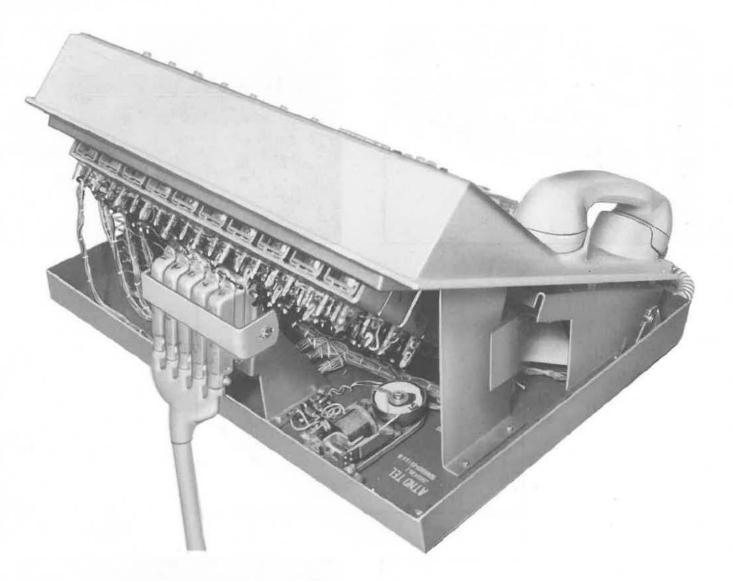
Rear View of Console Showing Cable Connector Properly Positioned-Less Spacer
